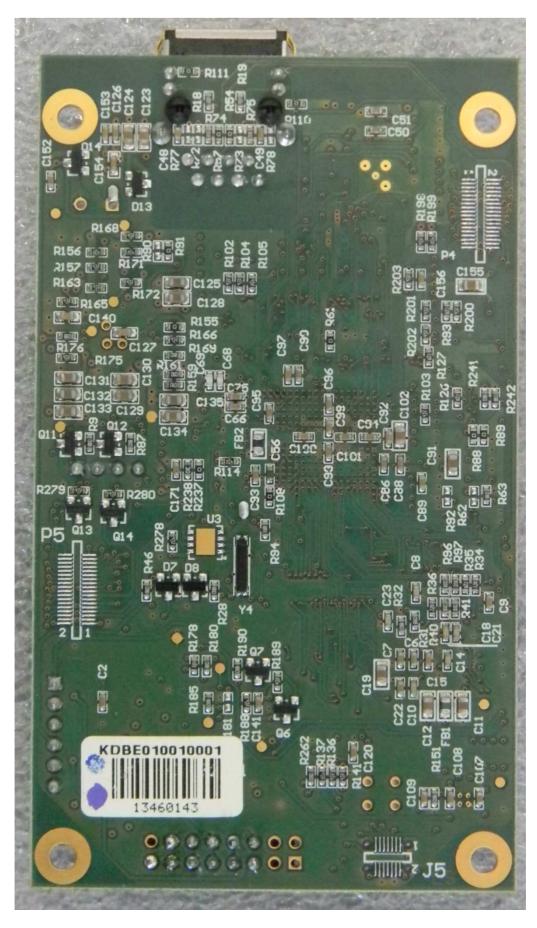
LEFT AND RIGHT BOARD FRONT VIEW
